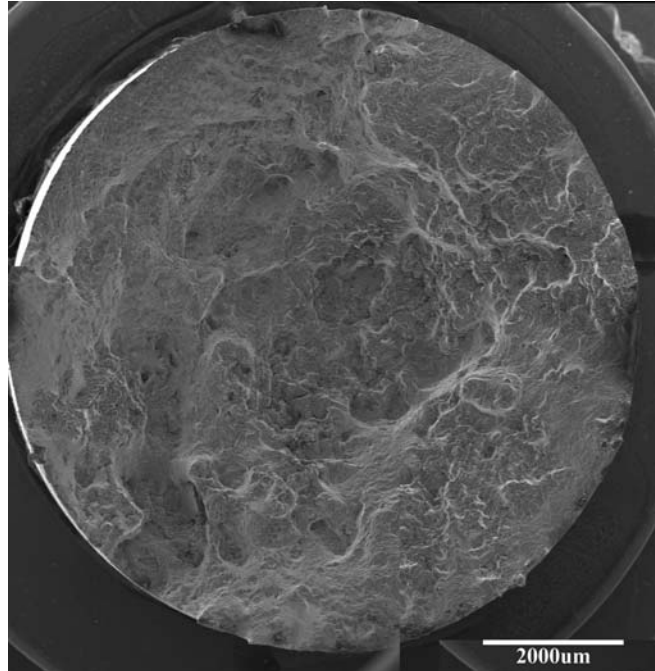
Macroscopic View of a Straight Cylinder Specimen Fracture Surface, $S_a = 588$ MPa (Specimen G5)
